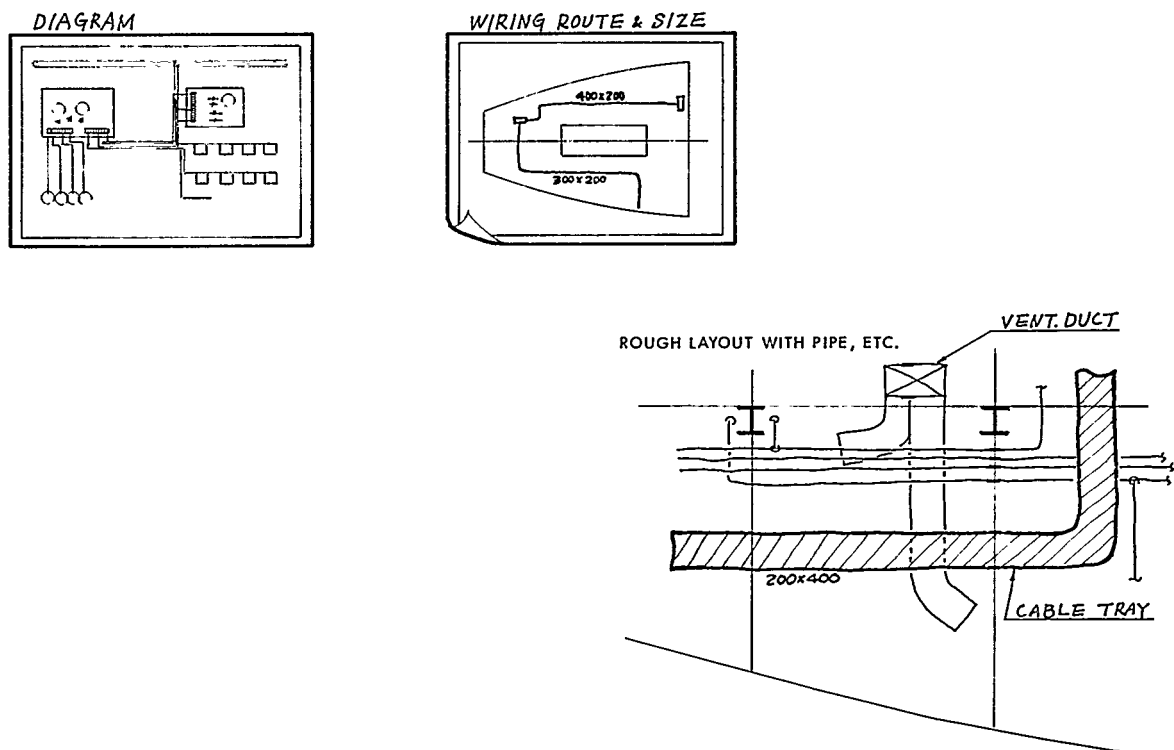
Freehand Layout for Cableways and Trays.
